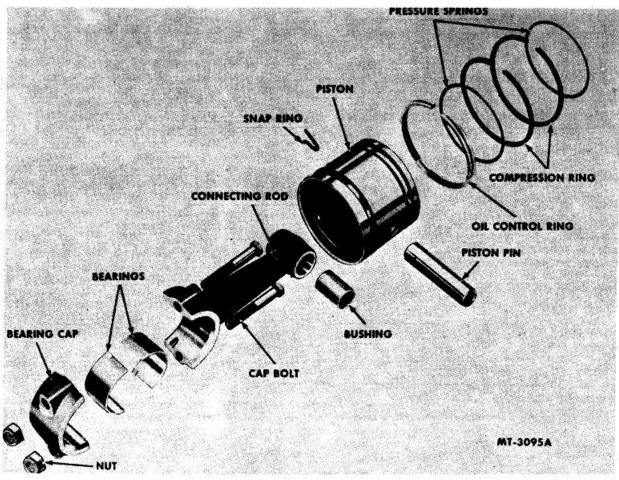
Model 7.4 and Early Design Model 12 Air Compressors – Piston and Connecting Rod Assembly (Exploded View)
